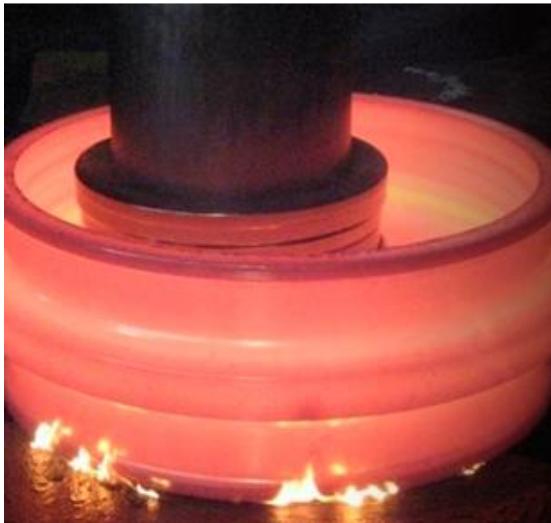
Ring that Schlosser has forged for their aero-bearing components².
